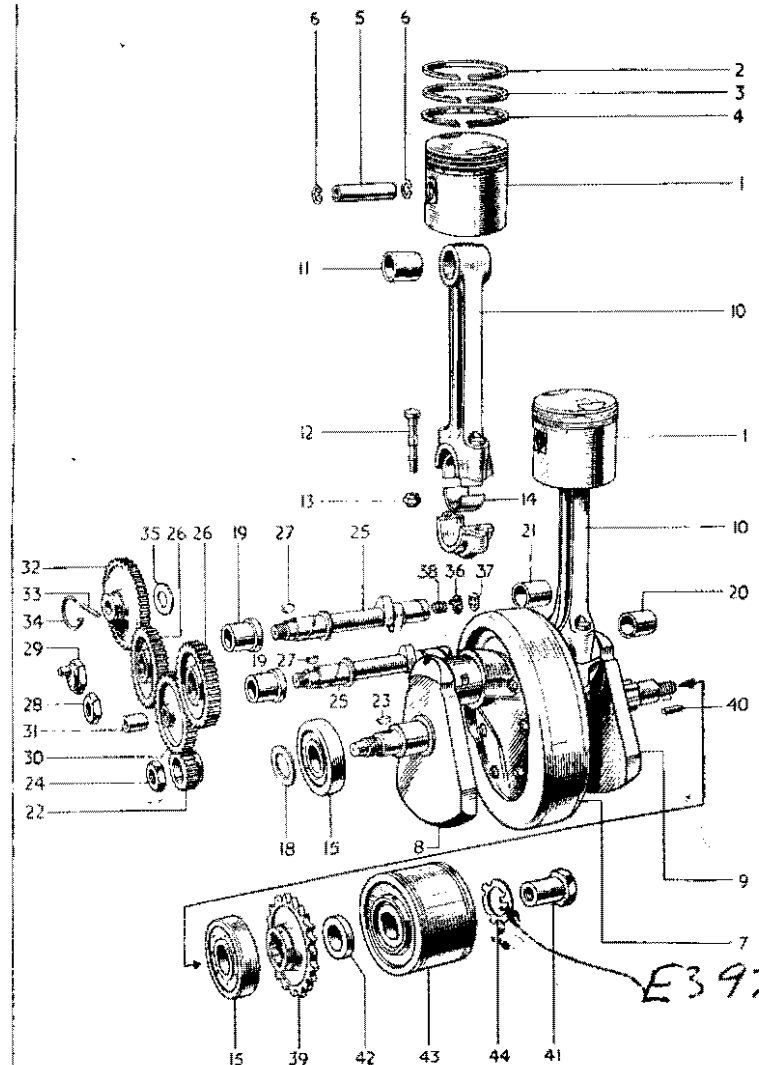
CRANKSHAFT, CONNECTING RODS, PISTONS, TIMING GEAR, etc.
